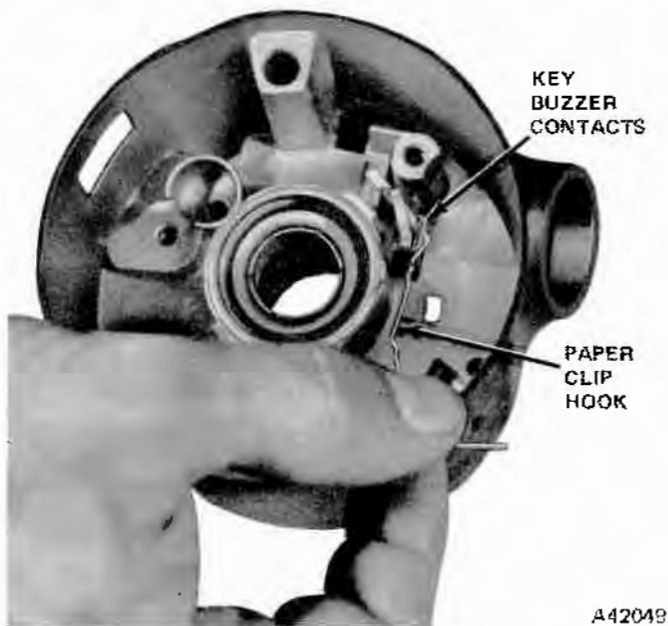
Removal of Key Warning Buzzer Contacts
